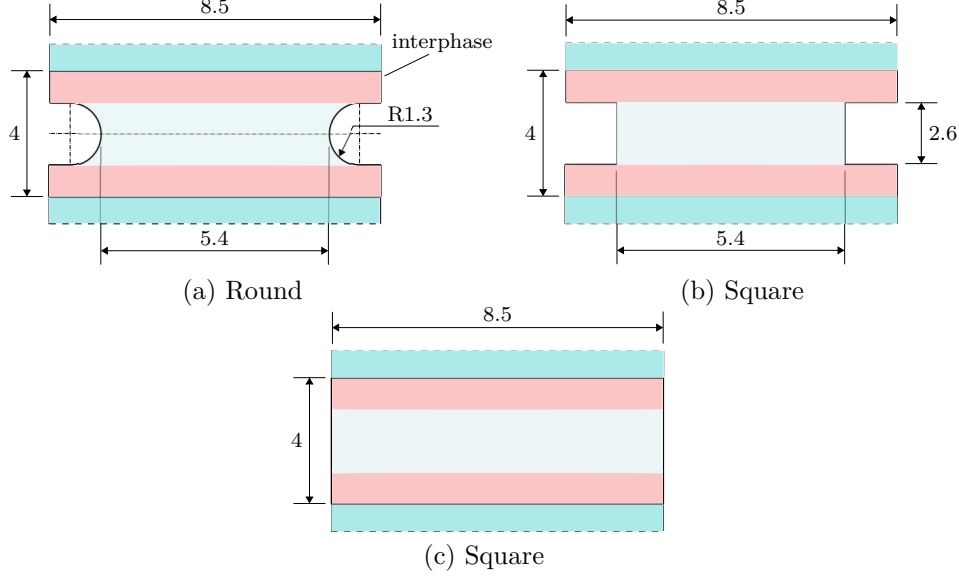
Rail shear test: cross-section profiles (dimensions in mm).
